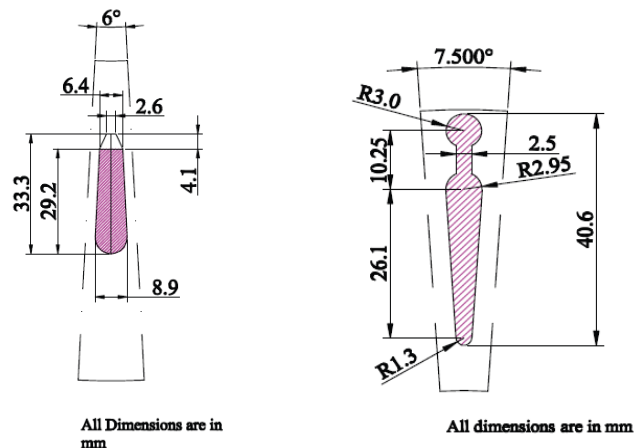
A stator slot dimension Figure 8. A rotor bar dimension
